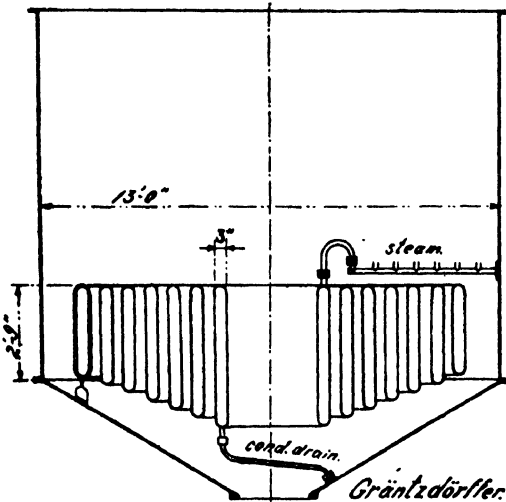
Ring-shaped Hollow Heating Bodies.
